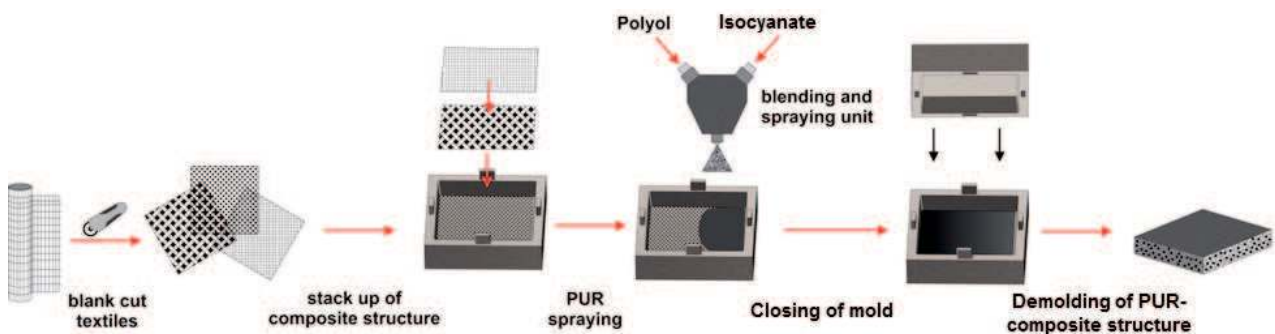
Manufacturing of test specimen using the polyurethane spray coat method
